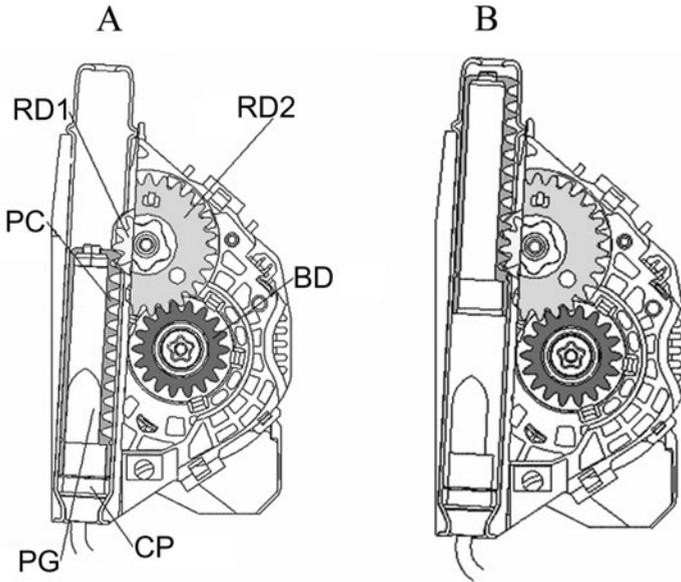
Pretensioner on the retractor with electric sensor: (A) before activation; (B) after activation. Components: RD₁, RD₂ and BD gear wheels, PC rack-piston, PG propellant, CP pyrotechnic charge.
